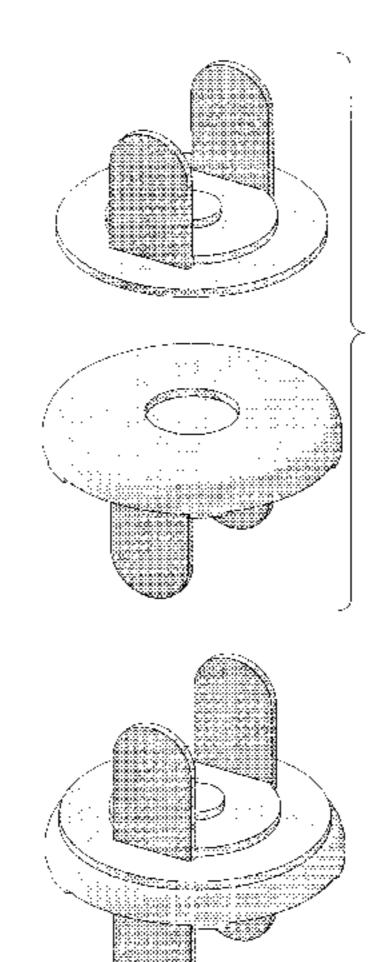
is a perspective bottom view of the third embodiment of the magnetic fastener showing the male and female parts in an open configuration;
